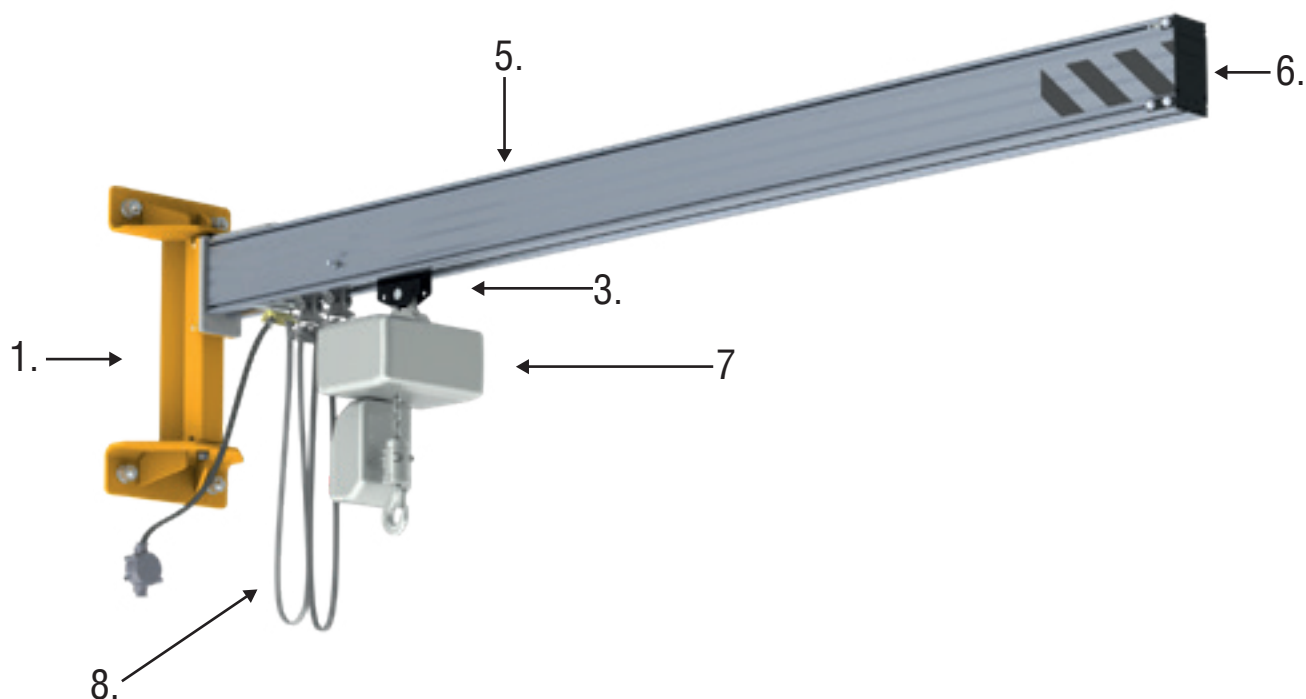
Wall-mounted jib crane for low headroom applications, aluminium
